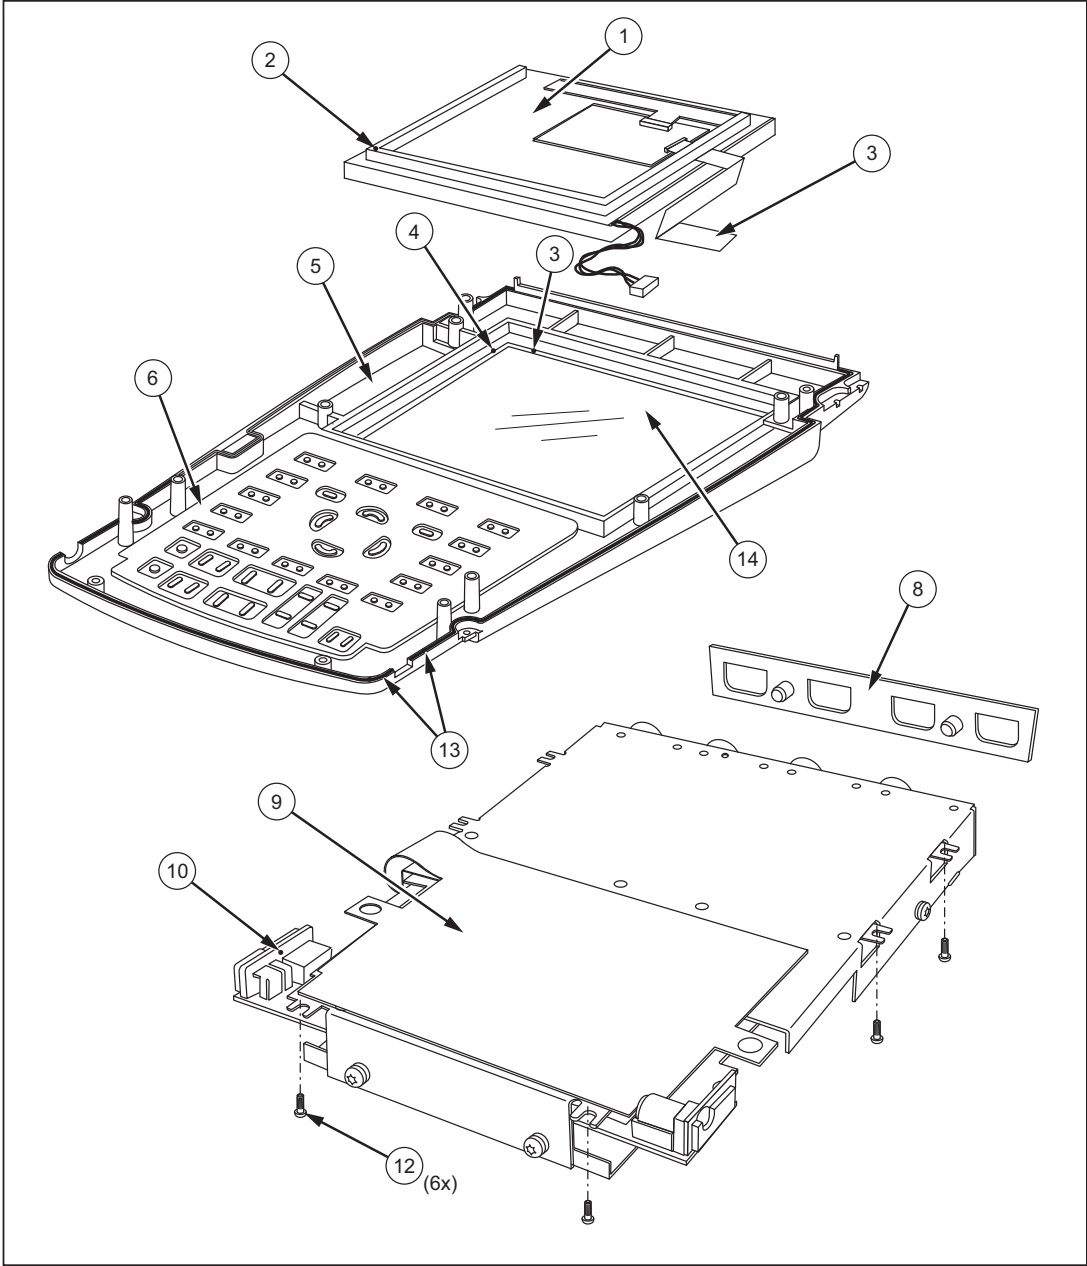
PCA Removed from Chassis, Bottom Side Visible
